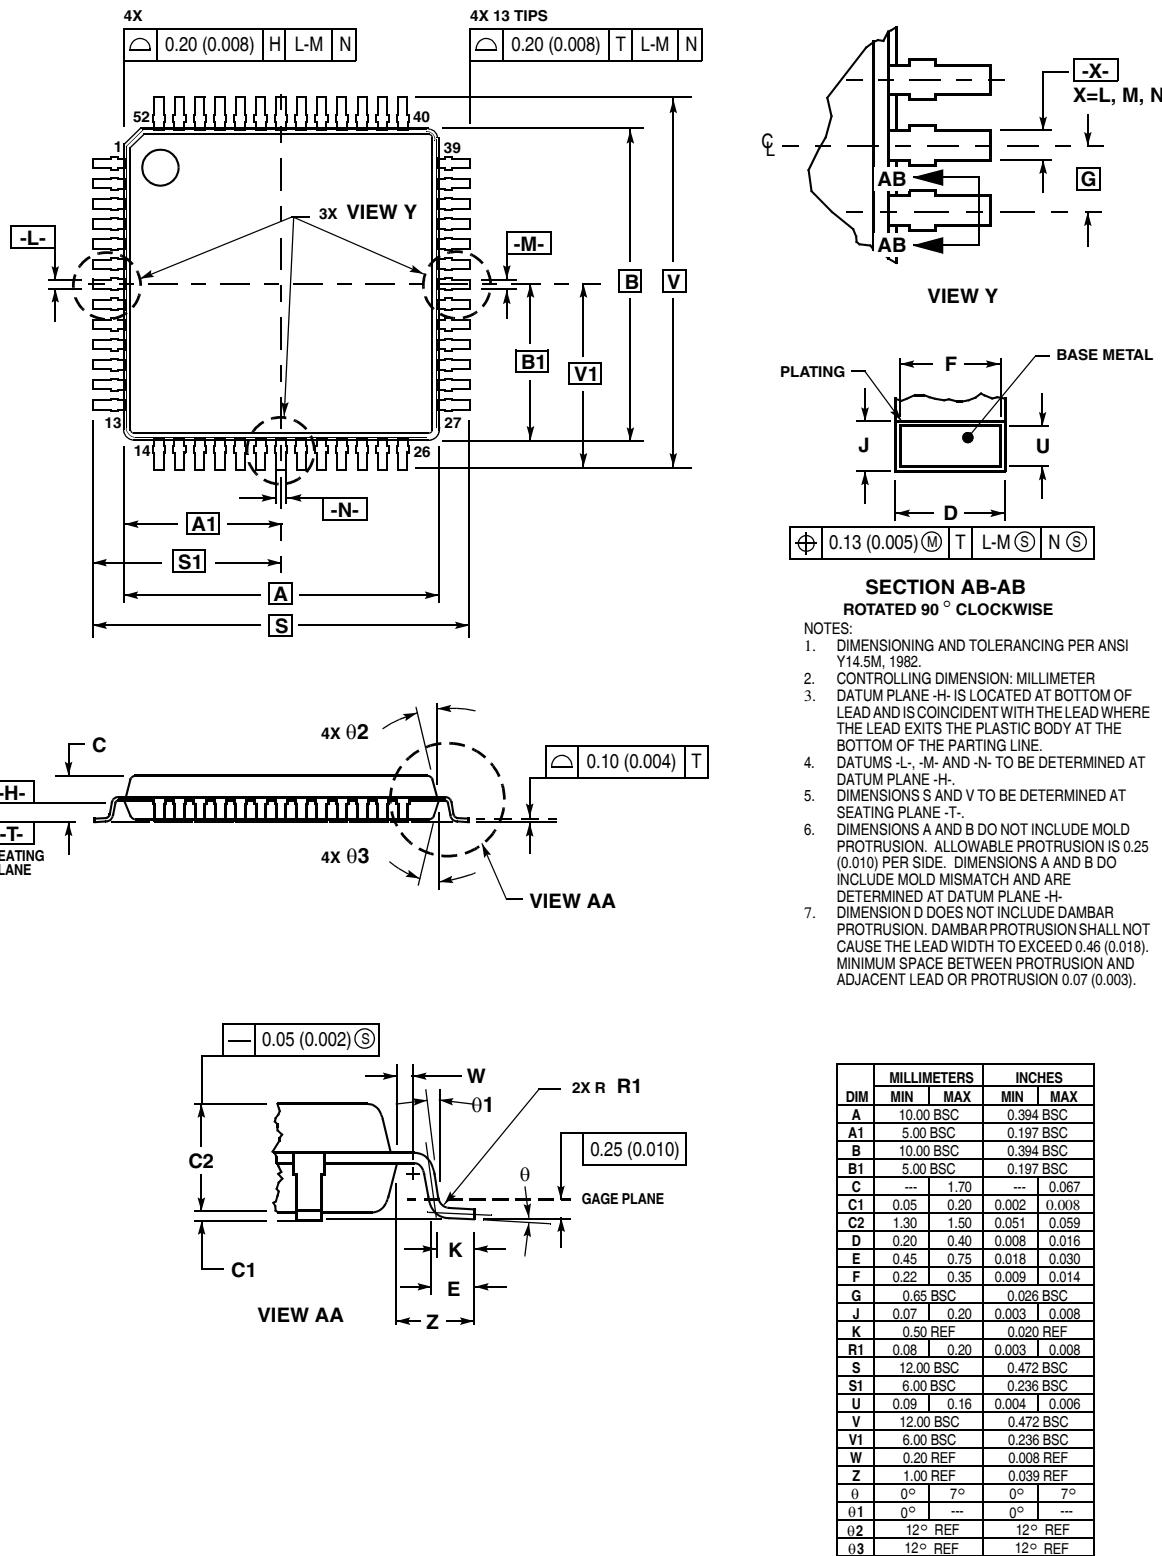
52-pin LQFP Mechanical Dimensions (case no. 848D-03)
